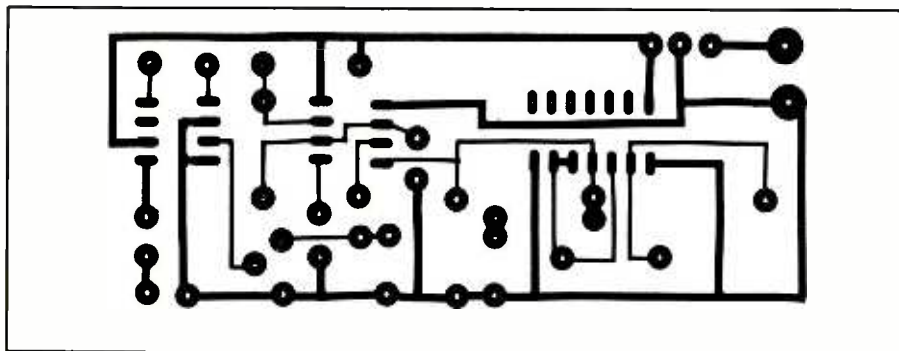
The actual-size etching-and-drilling guide for the project's printed-circuit board. Included are mounting locations for the optional power-amplifier stage's components.
